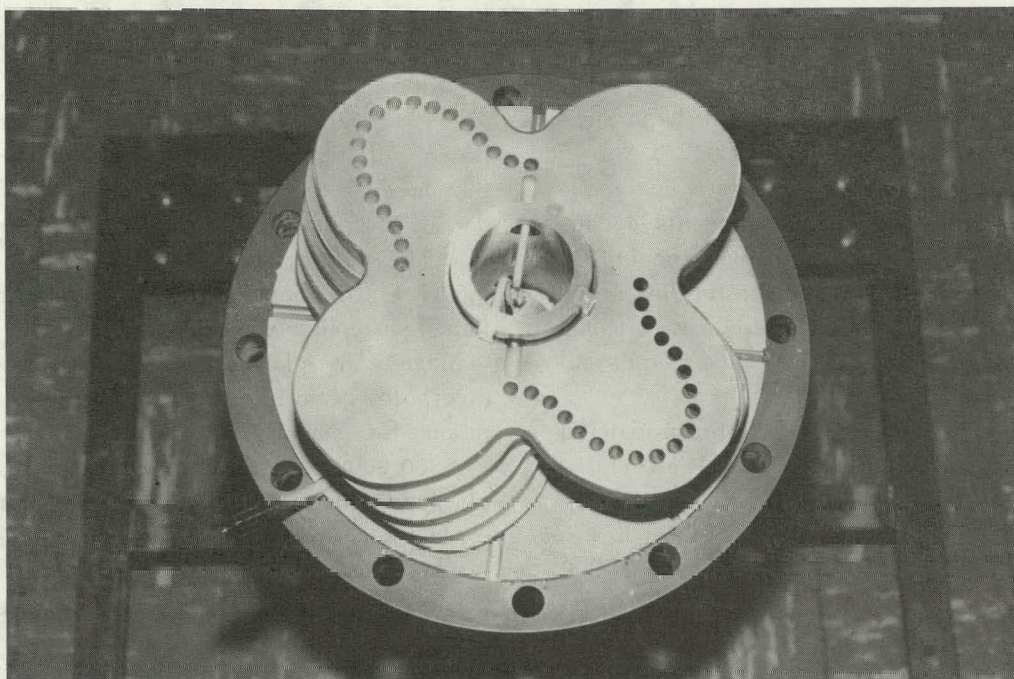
Prototype impeller stack on load frame base, top wafer and filler wire removed, cooling holes left out on two lobes, blank lobes are 0.5 in. minimum over finished size.
